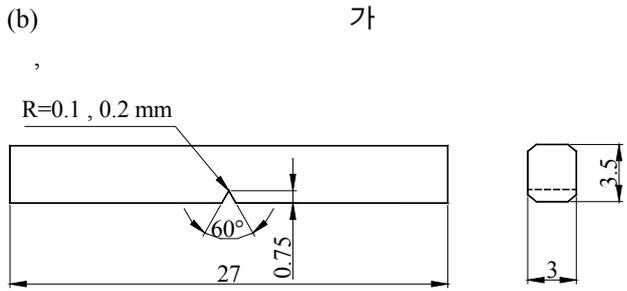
Geometry and dimension of subsize Charpy specimens in Zr- BAM
